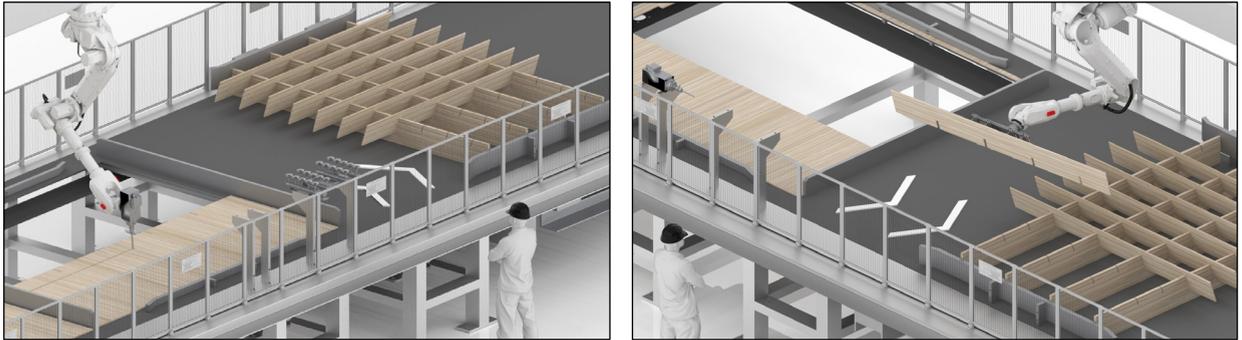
Manufacturing and assembly of the canopy elements with a robotic arm cell equipped with a tool changer
